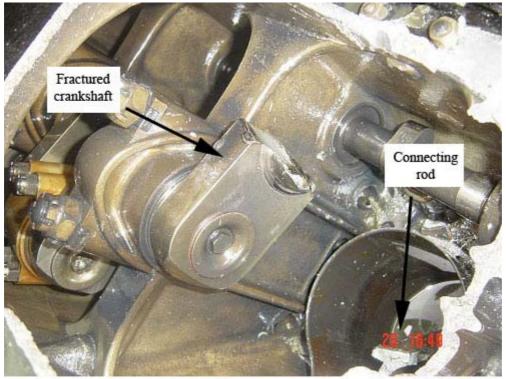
Failed crankshaft, No 1 cylinder and fractured connecting rod
